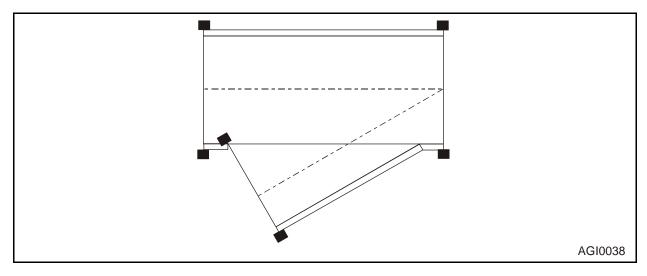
8 Connect Sawtooth Merge Section to Other Intermediate Sections
